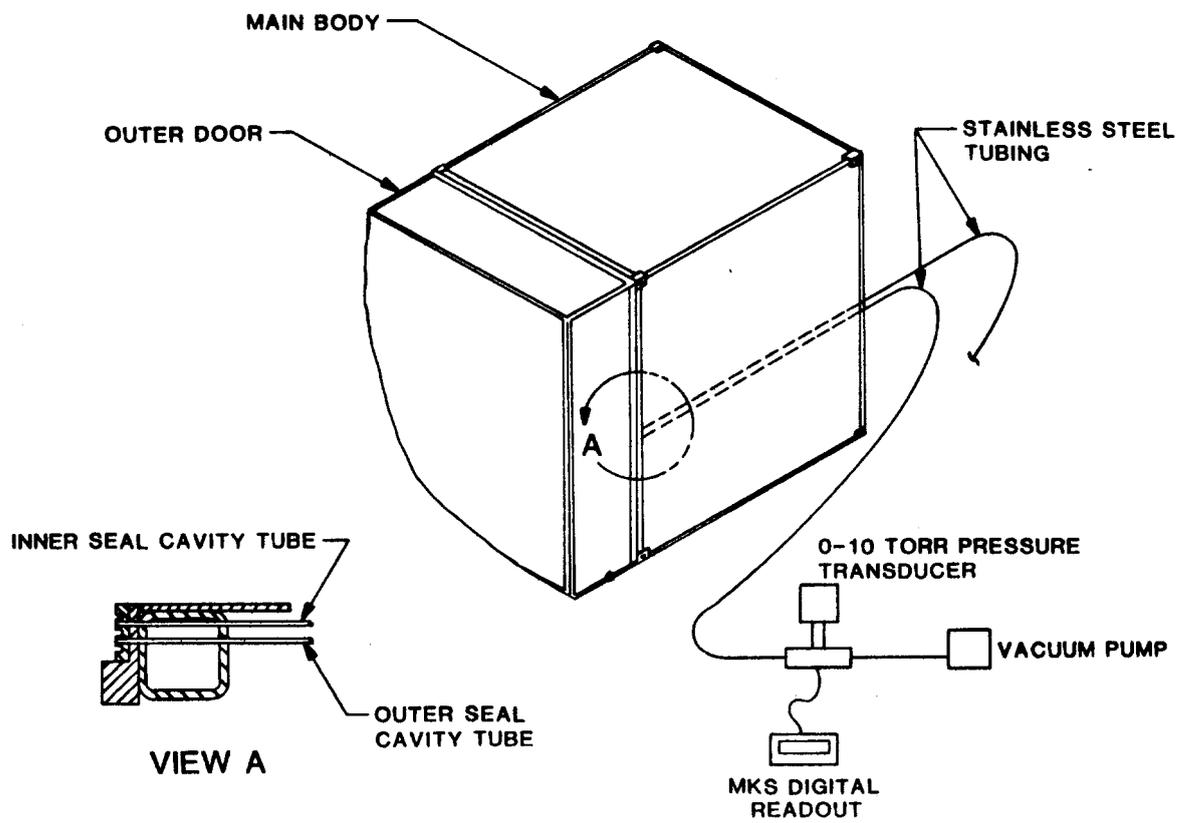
Inner Door Seal Leak Test Equipment Schematic
